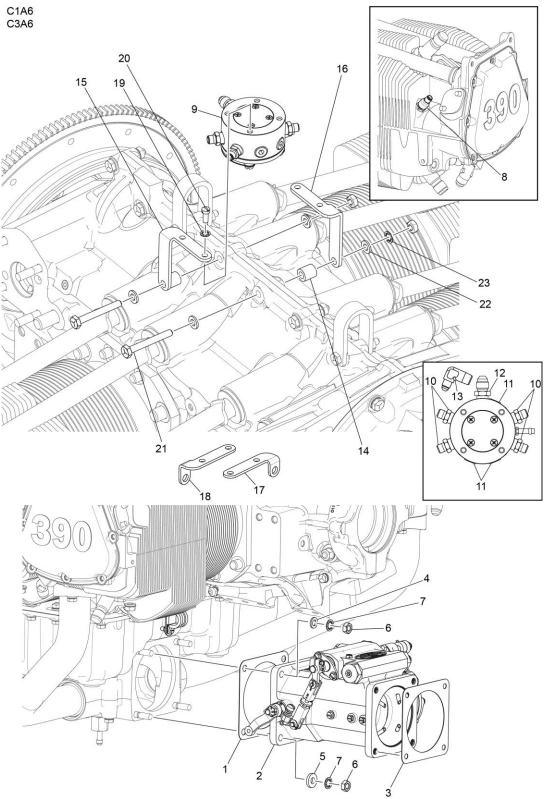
Fuel Injector, Fuel Manifold Assembly, and Brackets
